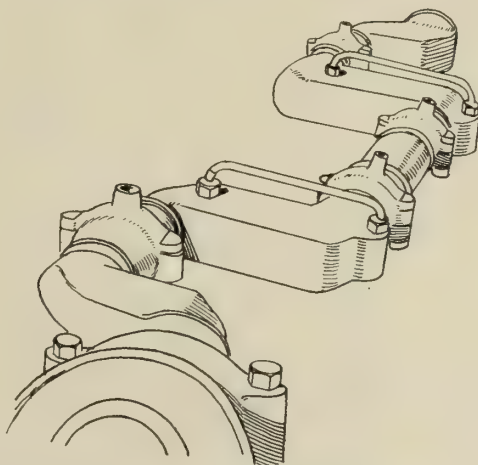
Fig. II. The oil leads on the crankshaft of the White petrol engine.
